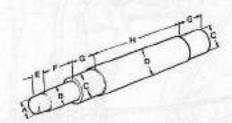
When installing Laycock clutch in 1190, 1290, 1390 and 1490 models use a pilot shaft made to dimensions shows.
